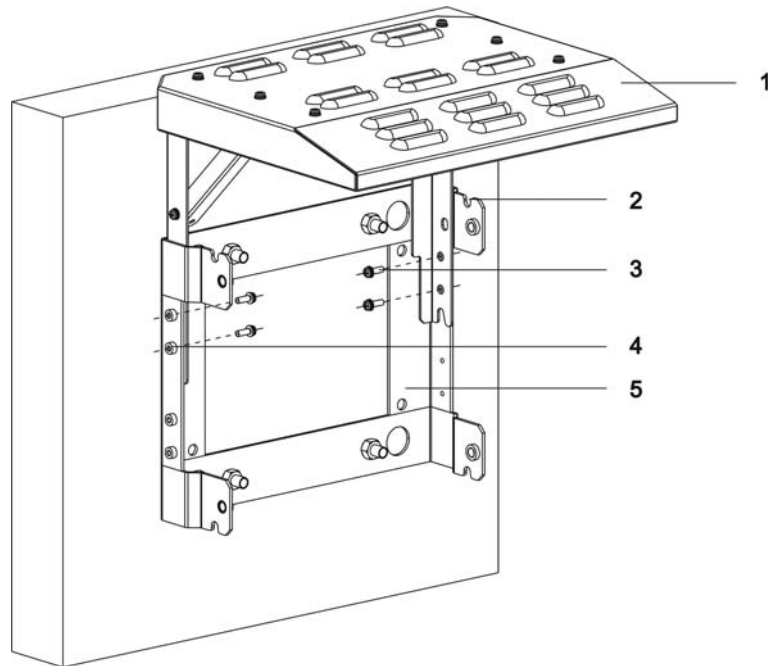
ASSEMBLING PROTECTIVE SHIELD (2)
